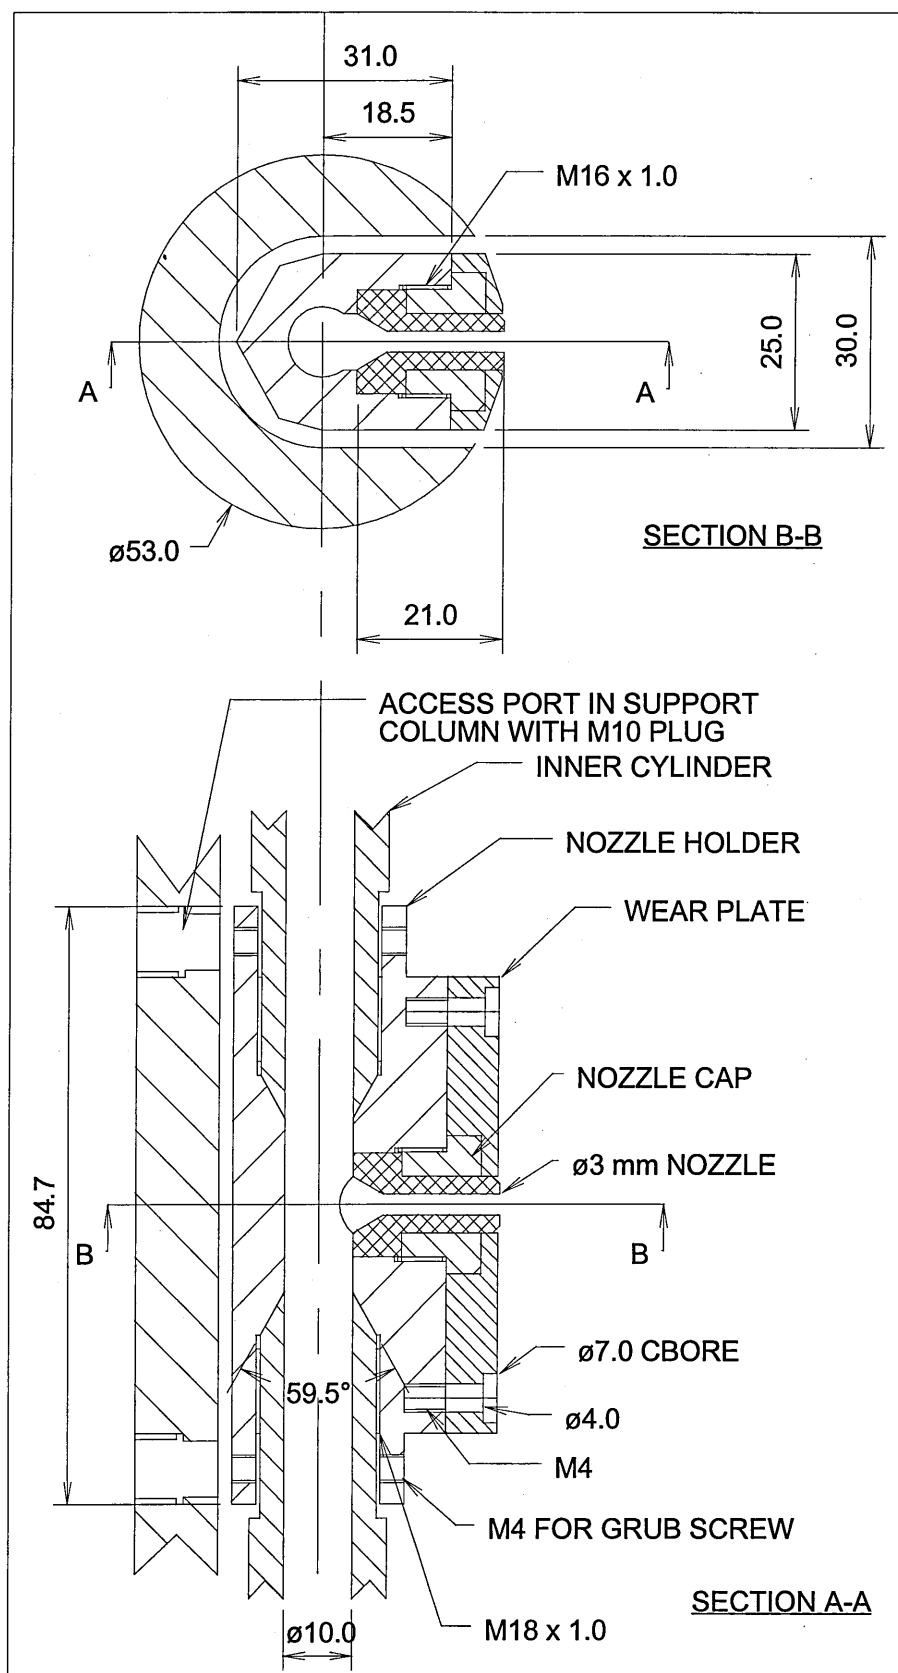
INNER CYLINDER AND NOZZLE HOLDER CONNECTION
